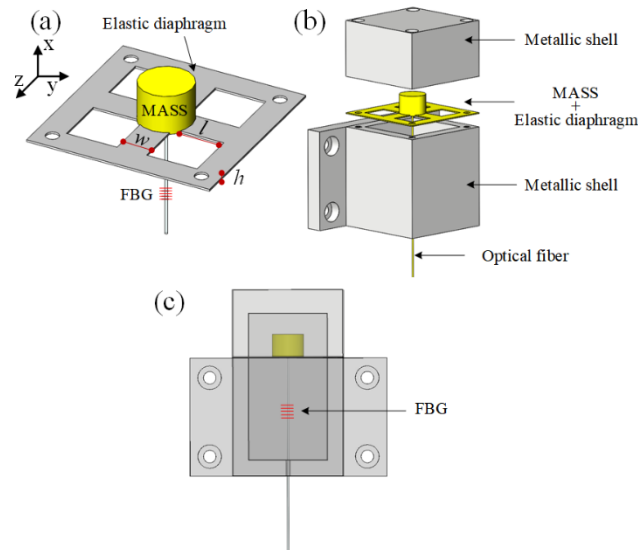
Accelerometer mechanical structure. (a) Elastic diaphragm and mass block combined structure, FBG one end is fixed inside the mass block. (b) Accelerometer assembly schematic. (c) Accelerometer internal perspective view.
